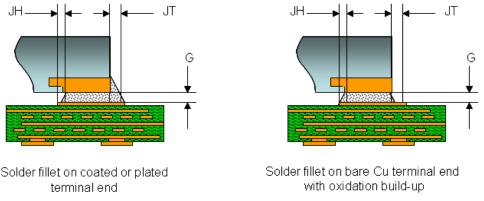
Comparing the solder fillet profile on QFN and SON terminal ends.
